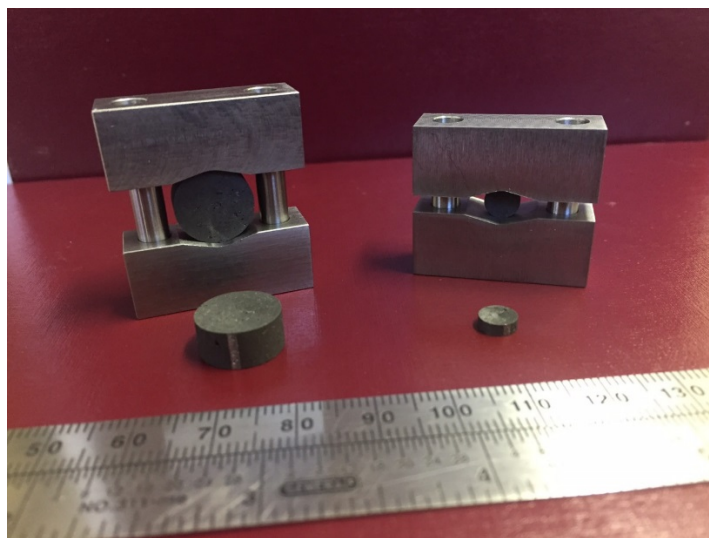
Example of test specimens and fixtures supplied by INL to each participating laboratory.
